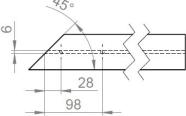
Drill hole positions for end feed with single expansion unit with aluminium overrun cap (45° cut on short side of substructure (support structure))
